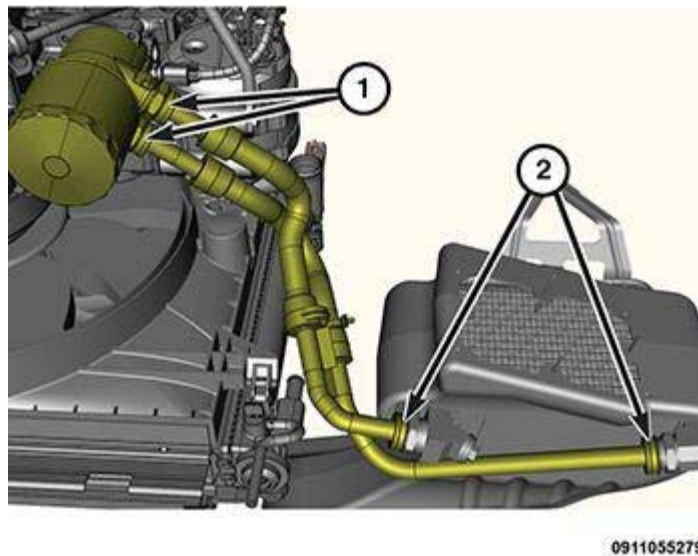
Quick Connect Spring Clips & Quick Connect Spring Clips
